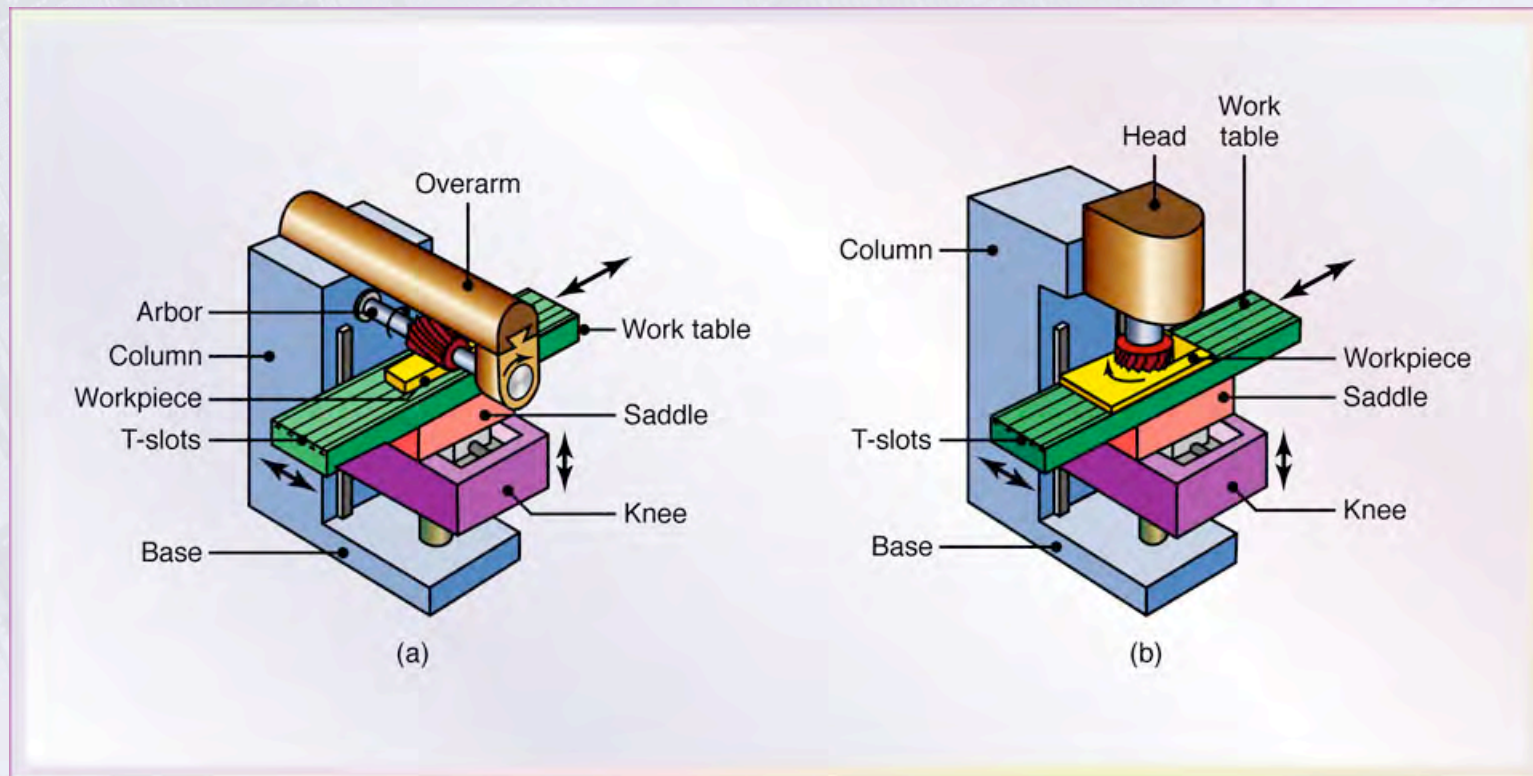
Schematic illustration of (a) a horizontal-spindle column-and-knee type milling machine and (b) vertical-spindle column-and-knee type milling machine. *Source:* After G. Boothroyd.
